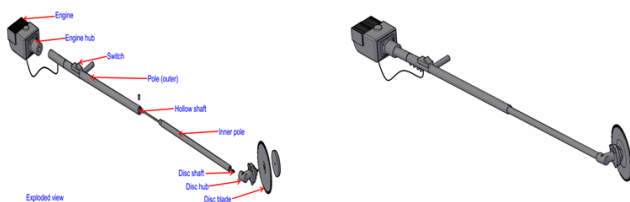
An isometric and an assembled diagram of the mechanical palm fruit harvester
